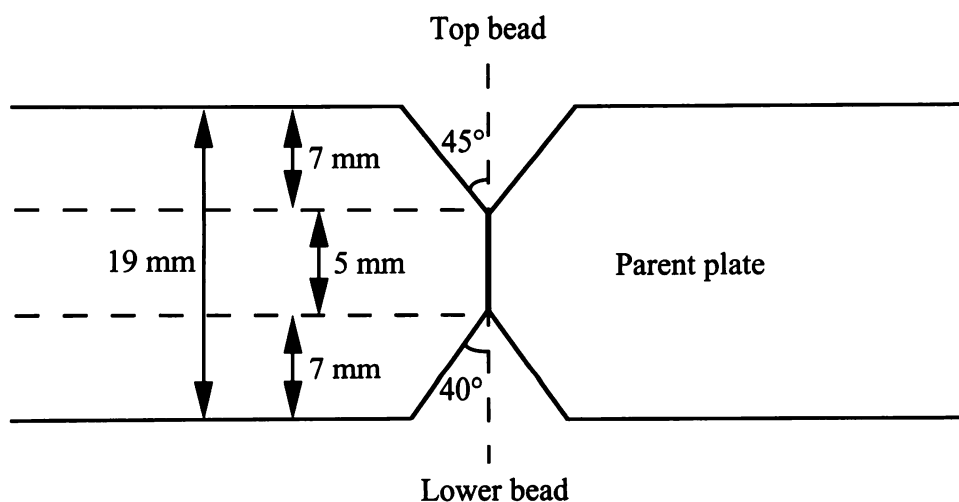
The geometry used to prepare the welds W279 and W280.
